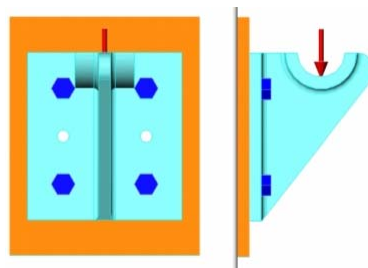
The menu during selection of eccentric loading of bolted joints.
